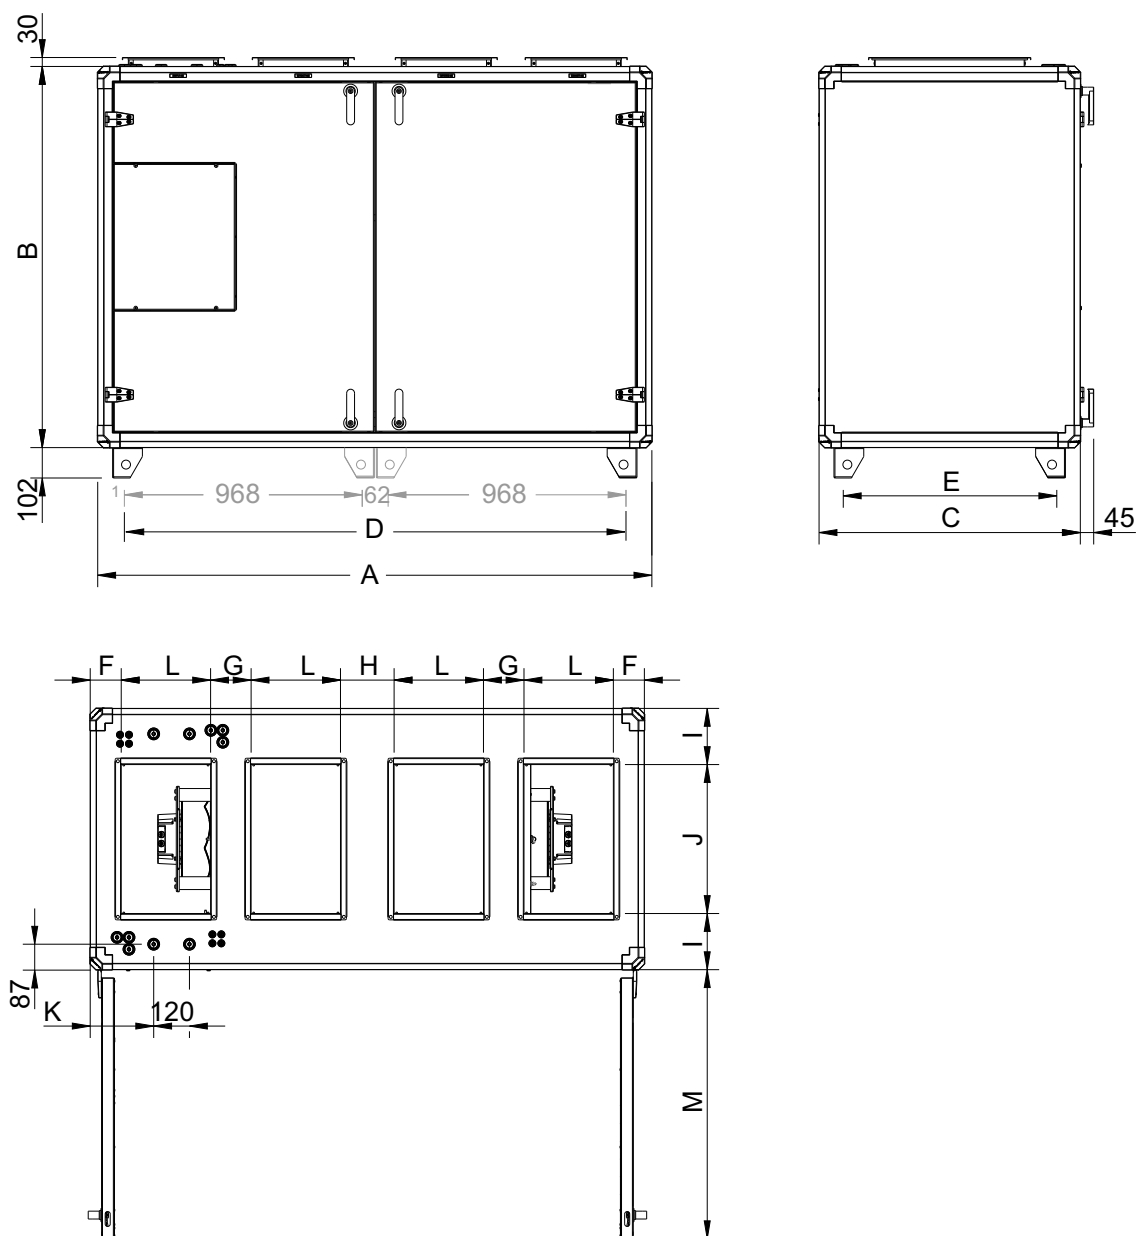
Dimensions (mm) Topvex TX/C04-06 drawn as left hand unit
